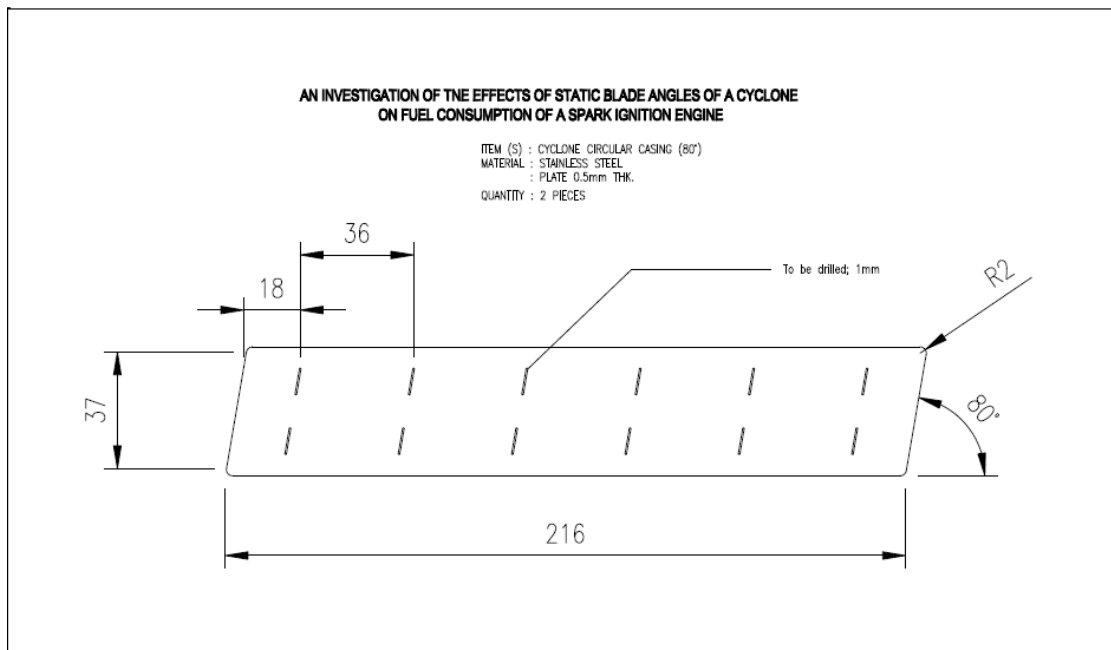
Drawing of Circular Cyclone Casing with 80°
